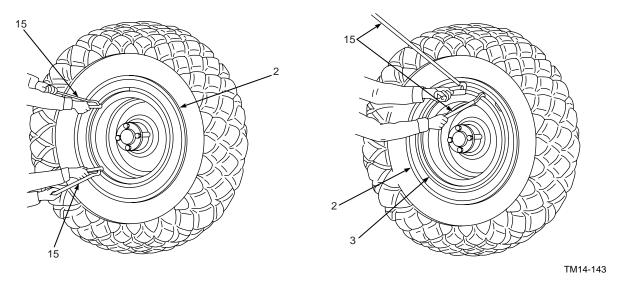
Installing Bead Seat Band and Outer Rim Flange
